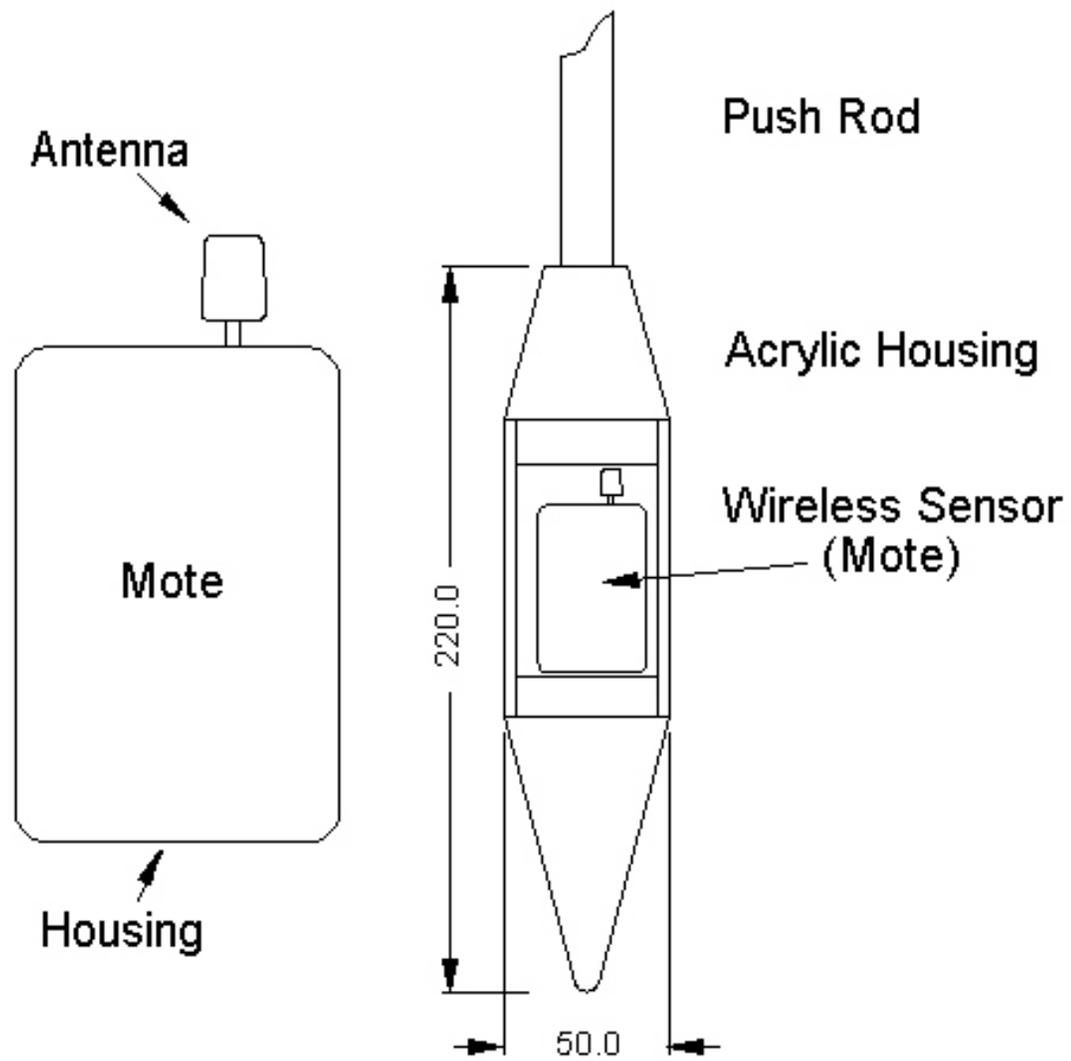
Acrylic housing constructed to place motes in grain. Dimensions are in mm.
